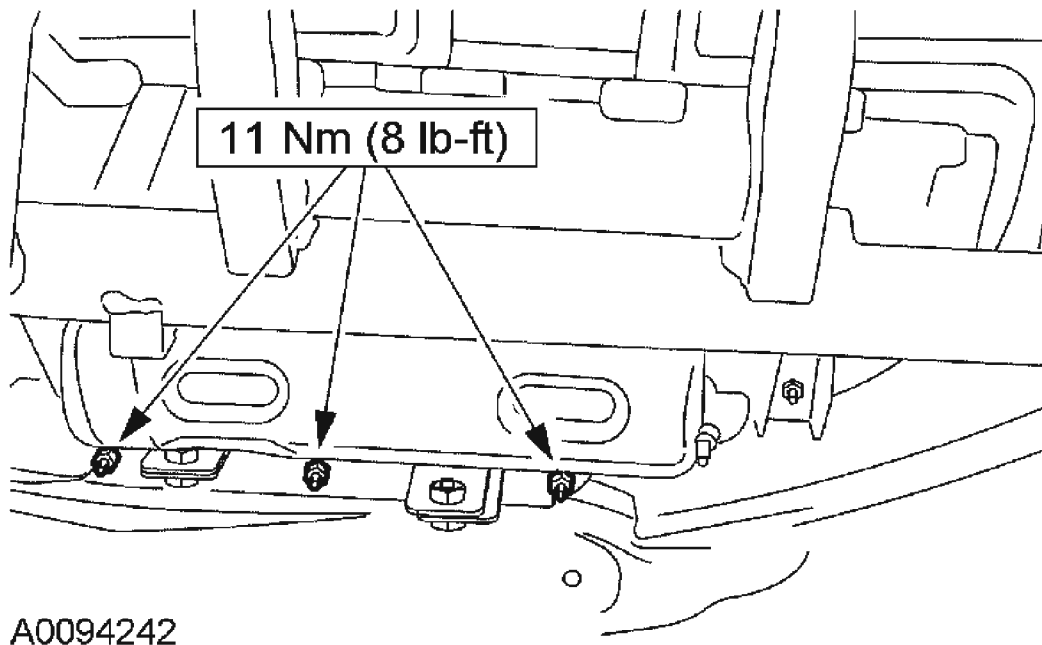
Tightening Passenger Air Bag Module Floating Bracket Retaining Bolts
